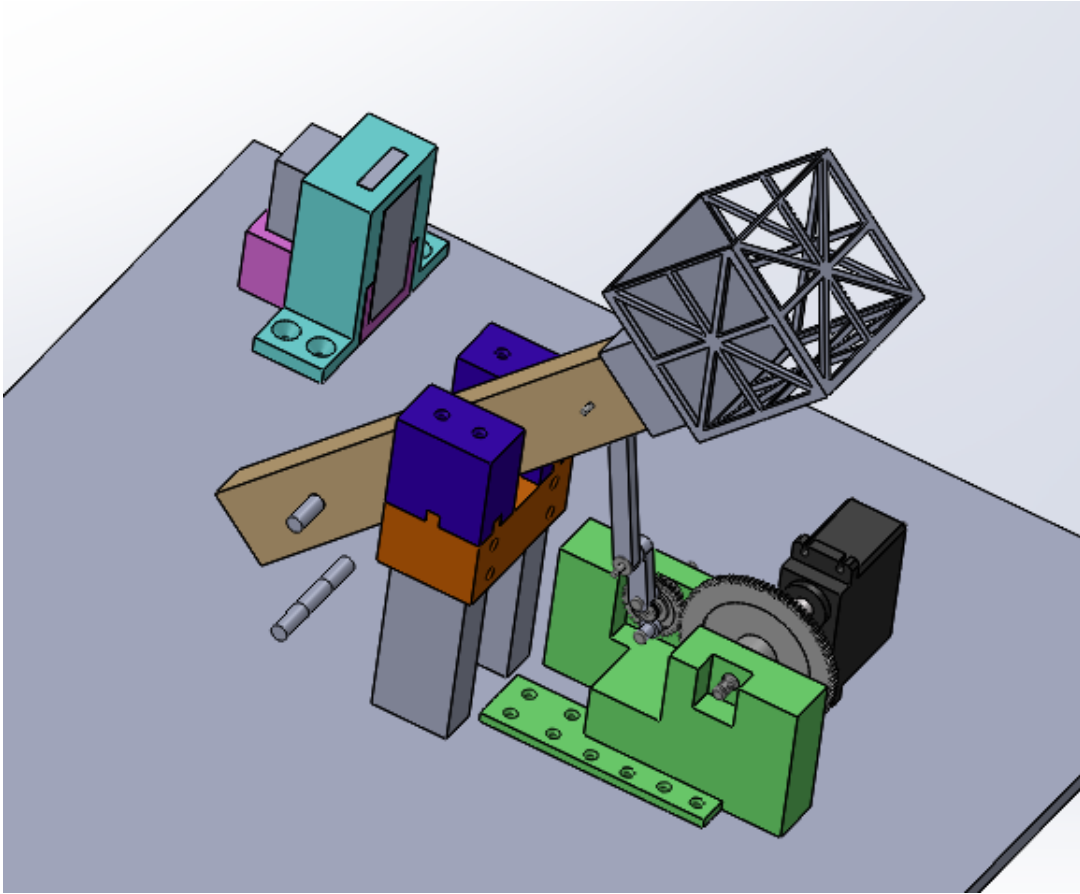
A screenshot of the final CAD assembly, ready to be printed and assembled.
